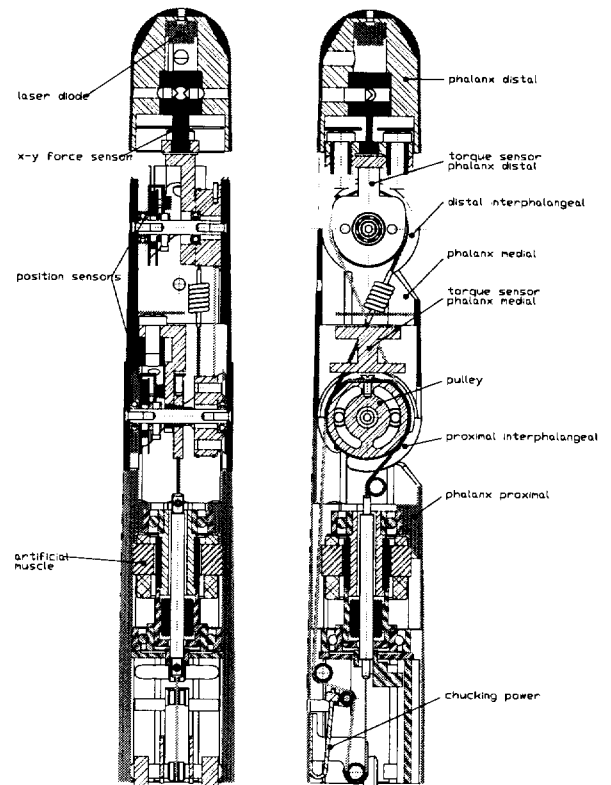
Design of the finger unit with one integrated actuator and two coupled joints.
